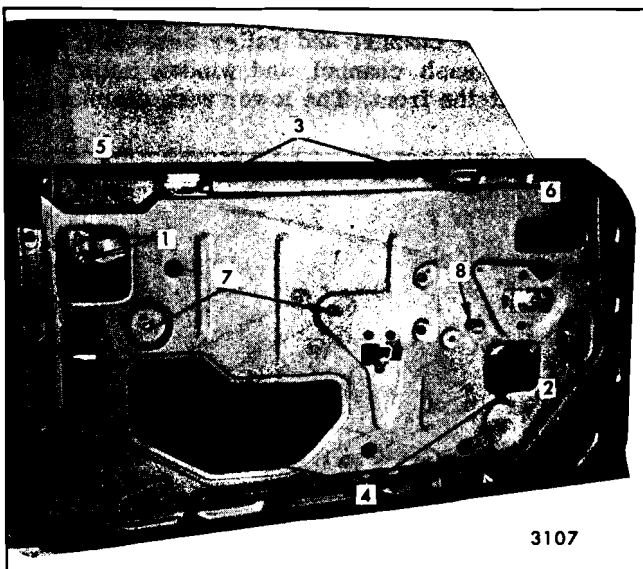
Door Window Removal and Adjustment - "F" Styles
